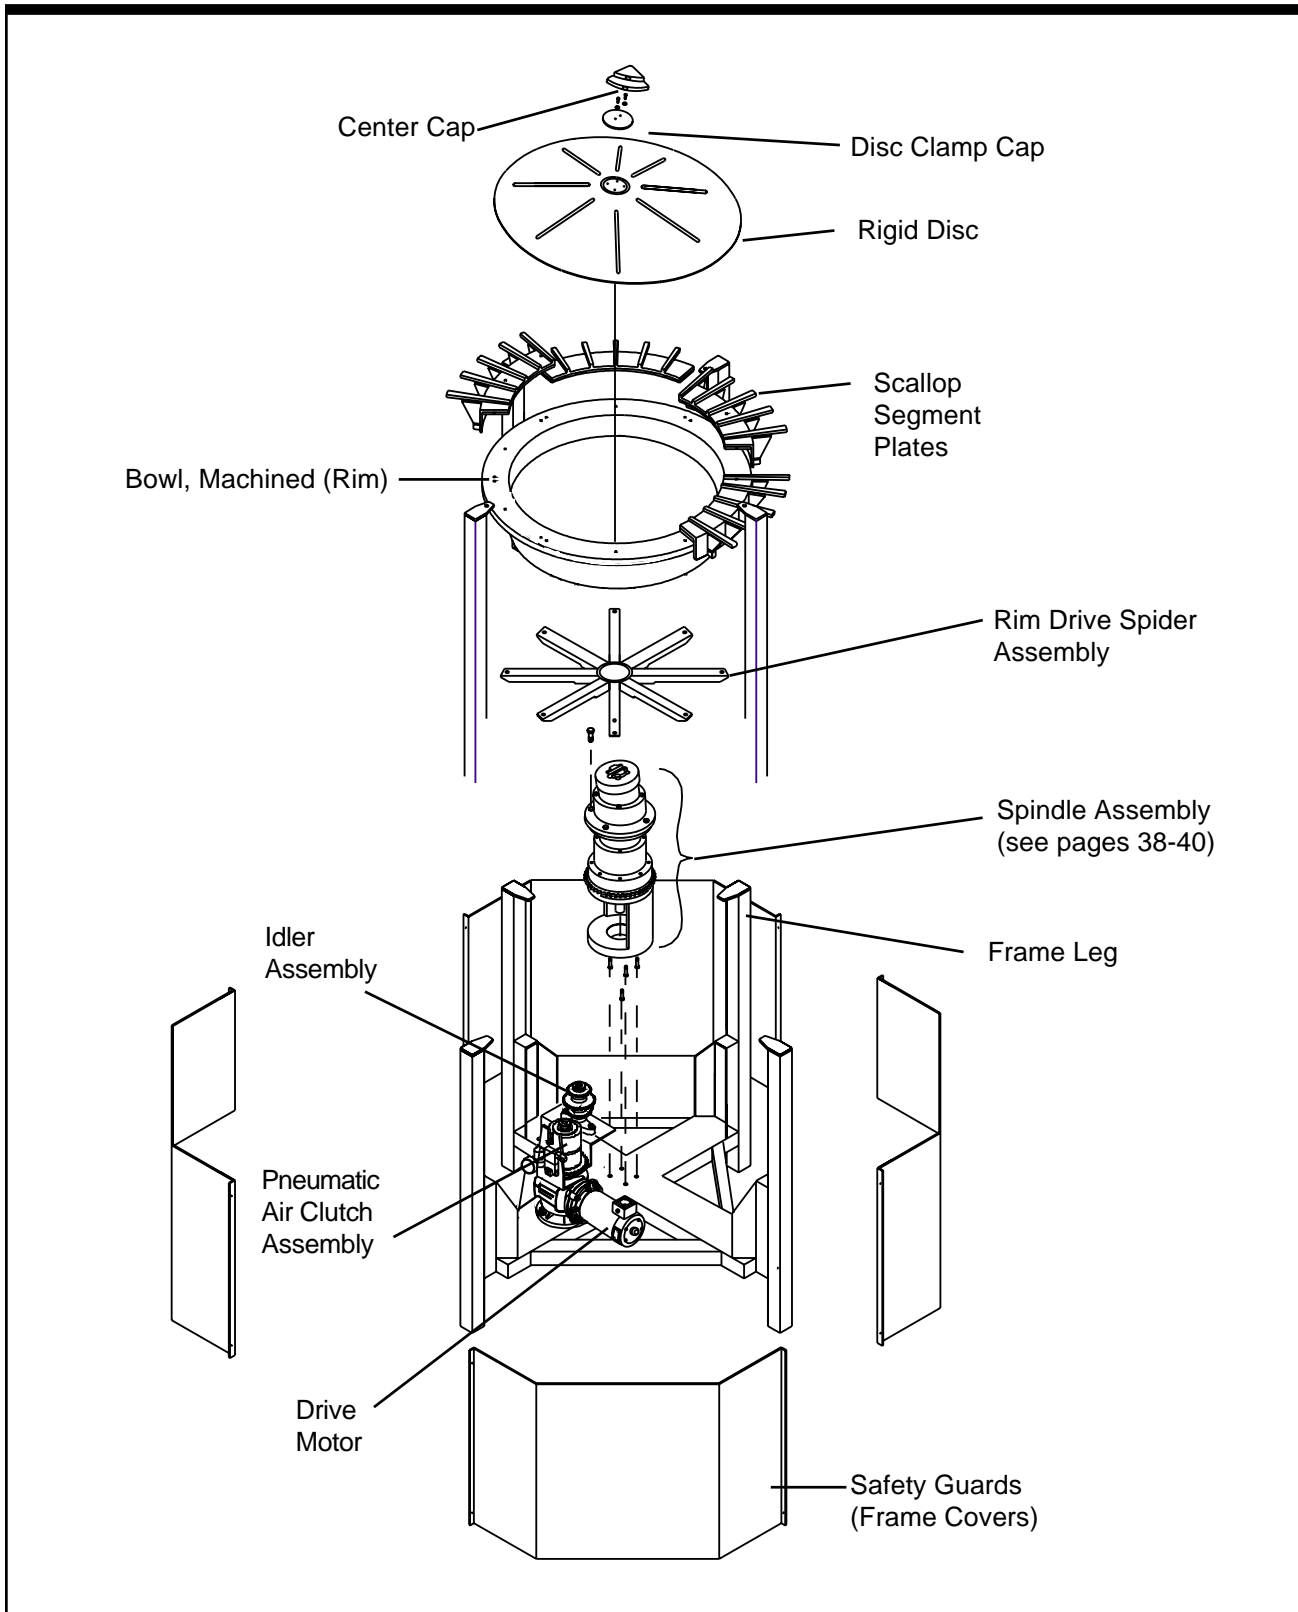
FS-40/50-RD Feeder: Overall Exploded View
